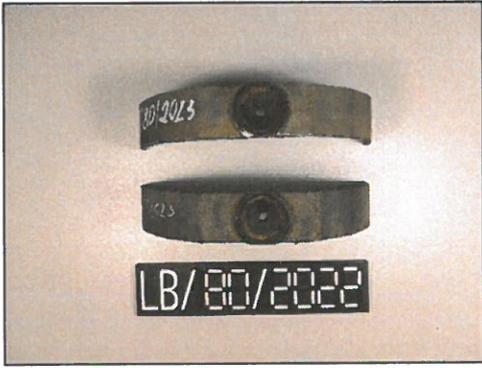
, 38 Samples LB/80/2023 before bending test on welded plugs
